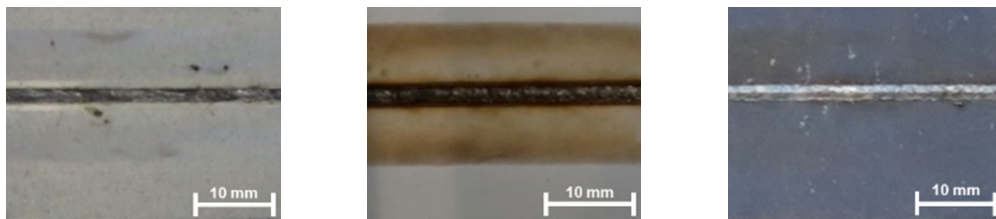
Face of weld of different steel-sidedly laser beam welded dissimilar joints of steel and aluminum alloys: HX220LAD+Z100 and AA6016-T4 [left], 1.4301 and AA6016-T4 [center] and 22MnB5+AS150 and AA6016-T4 [right].
